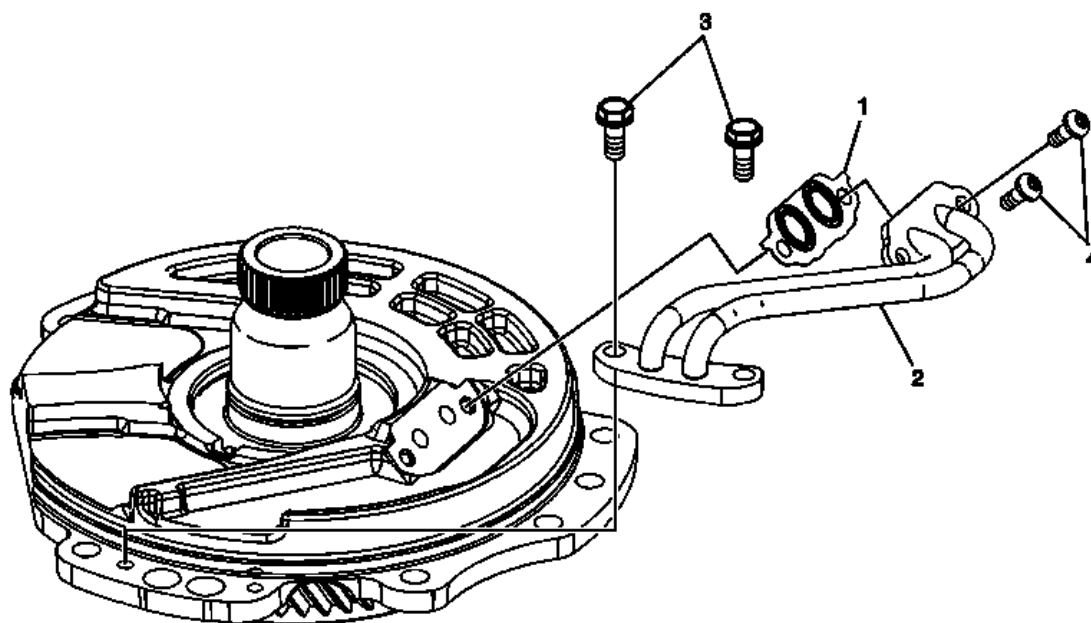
Identifying Front Differential Transfer Drive Gear Support Fluid Passage Tube
